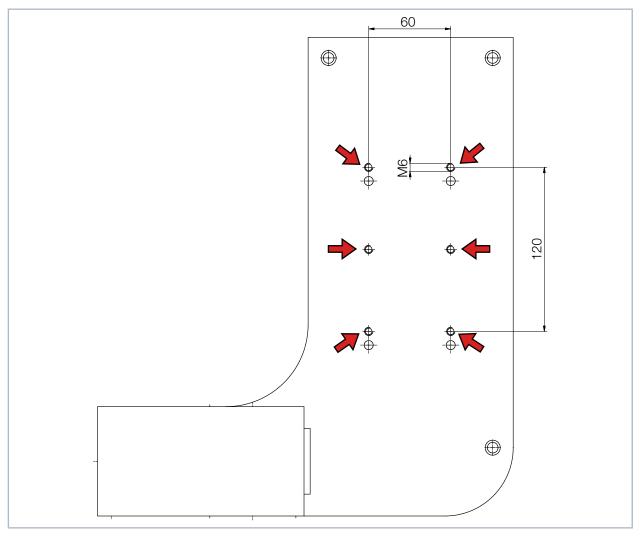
Fastening threaded holes LQM 200/500 with bottom plate
